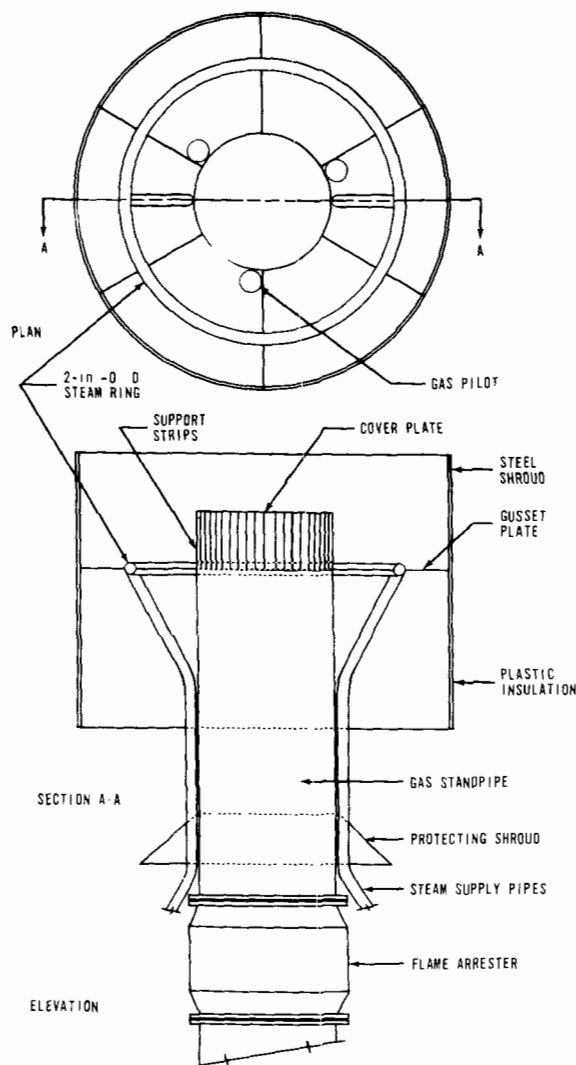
Detail of Sinclair flare burner, plan and elevation (Decker, 1950).
